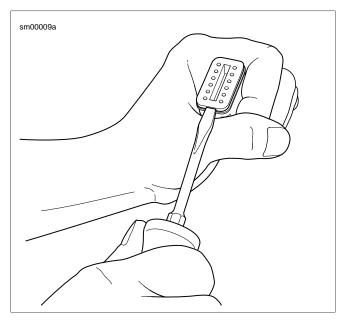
Deutsch DT Sealed Connector: Remove Secondary Locking Wedge
